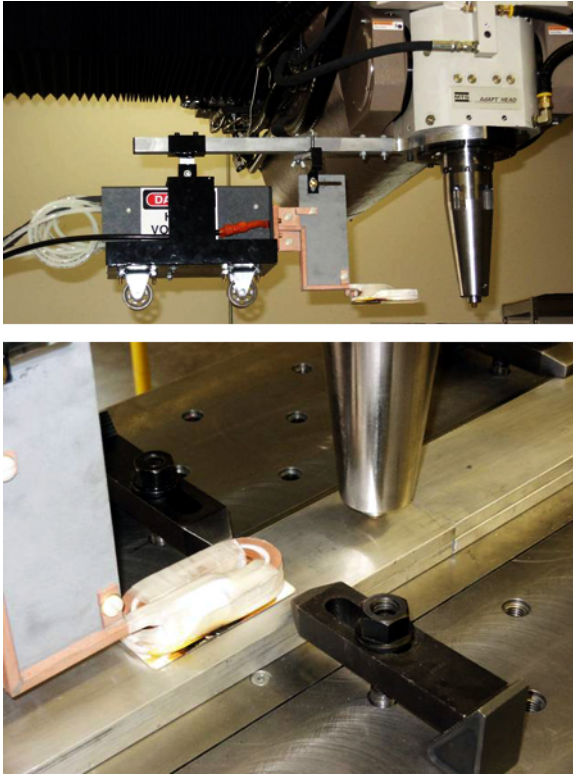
Induction pre-heating head mounted to FSJ machine spindle.
